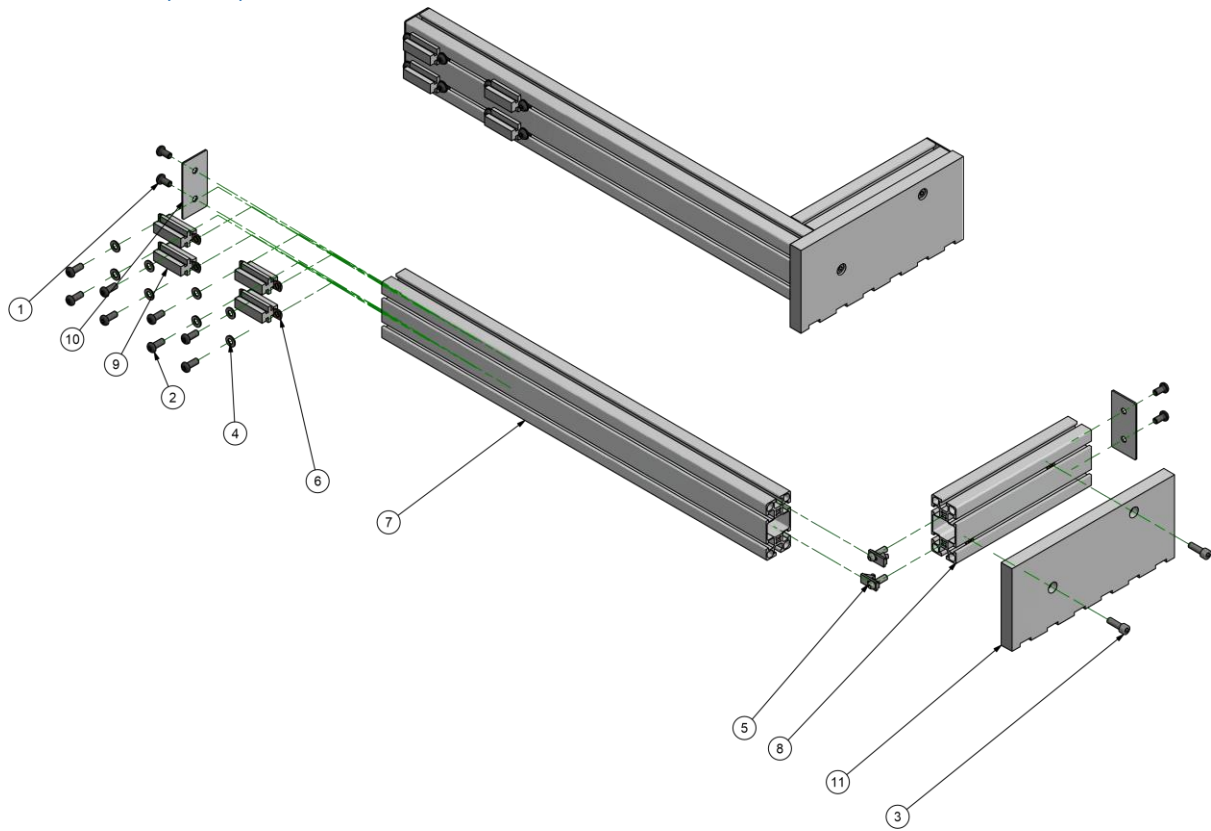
, Trolley/Stop Assembly (SMPGPTK1)
